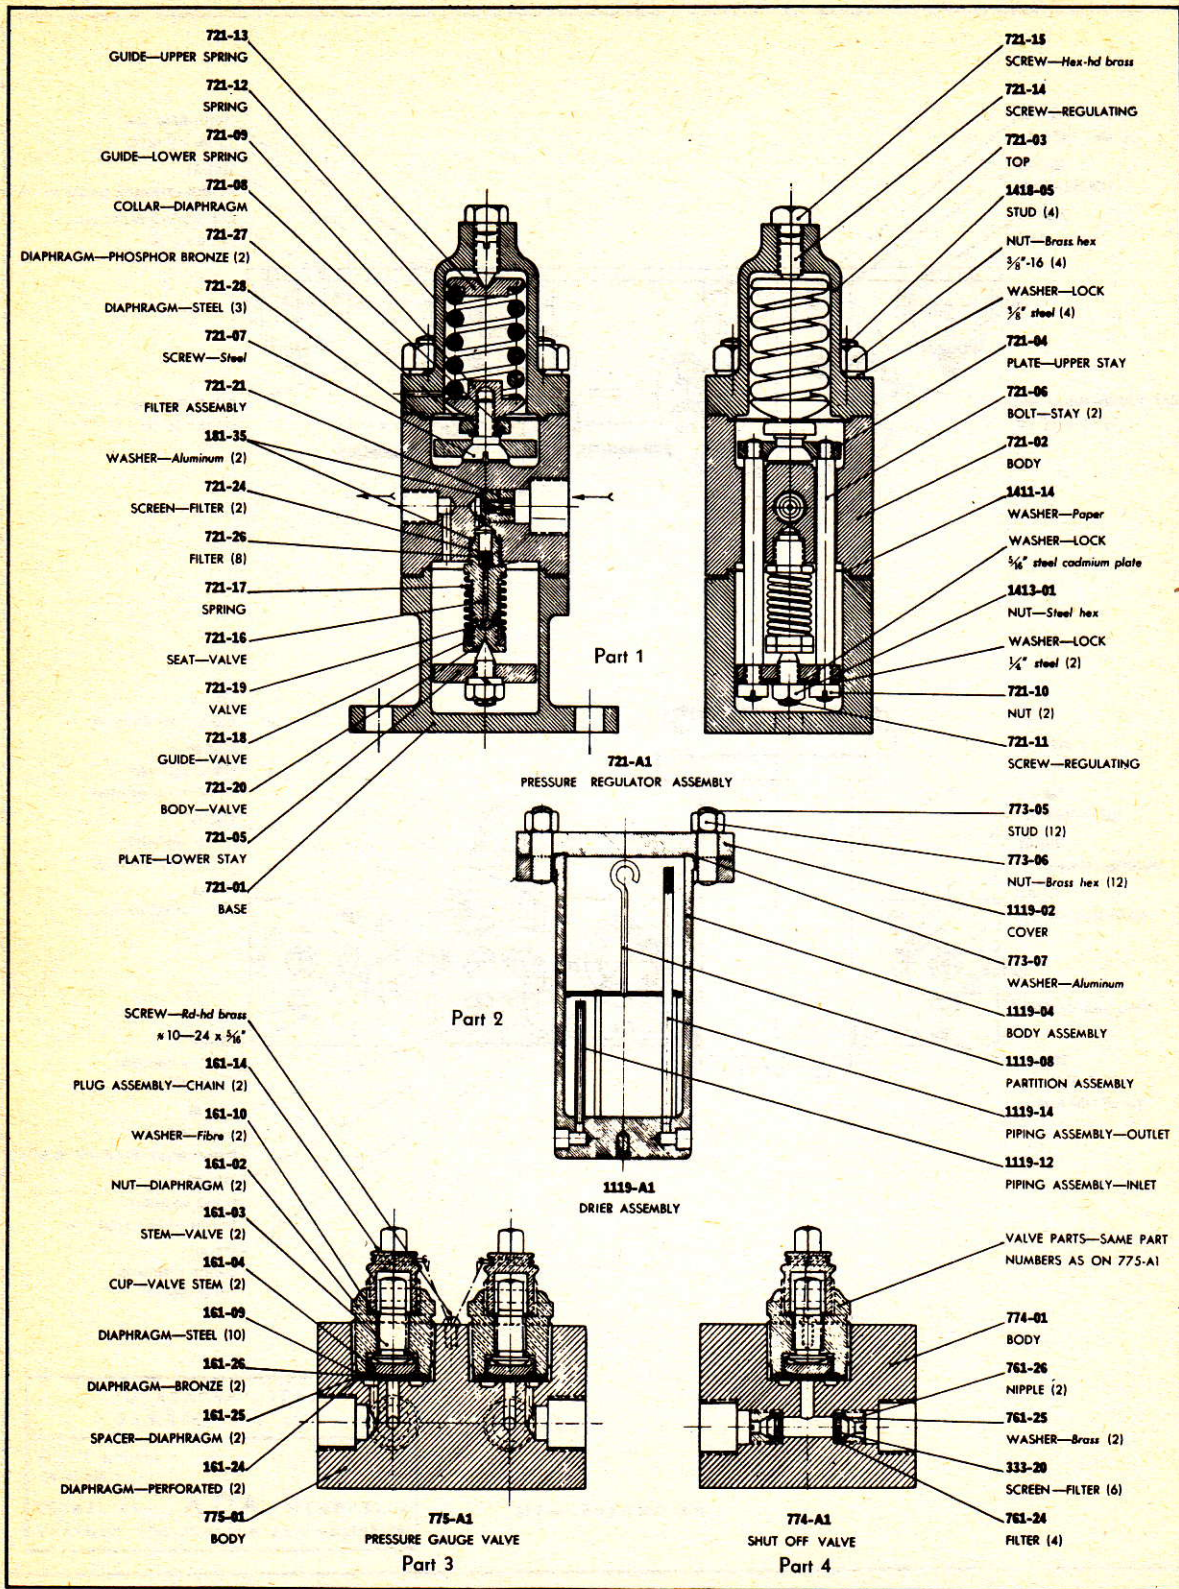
Parts assemblies for CO₂ bell striker.
